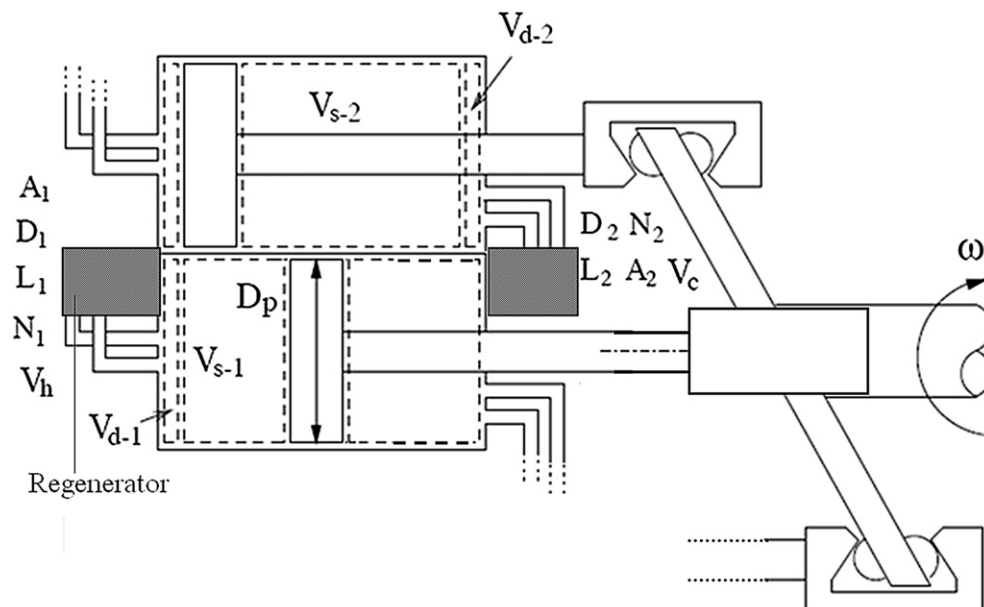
Schematic representation of the sliding disk mechanism ("swashplate") and cylinders-regenerator unit consisting of a hot space, a cold space and a regenerator.
